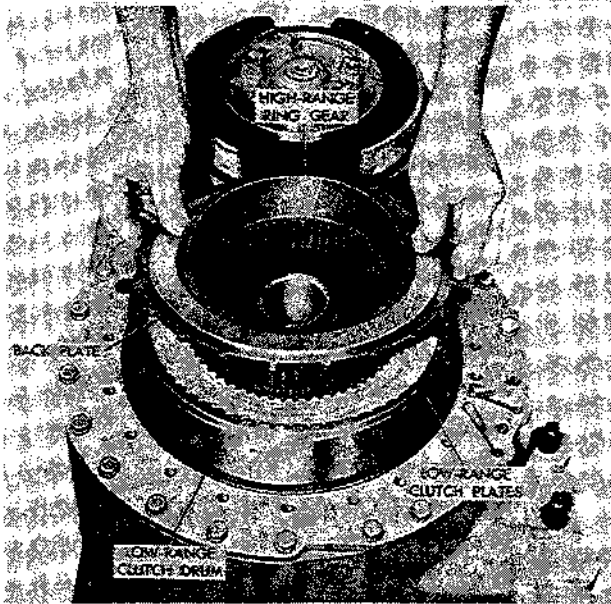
INSTALLING LOW-RANGE CLUTCH BACK PLATE
